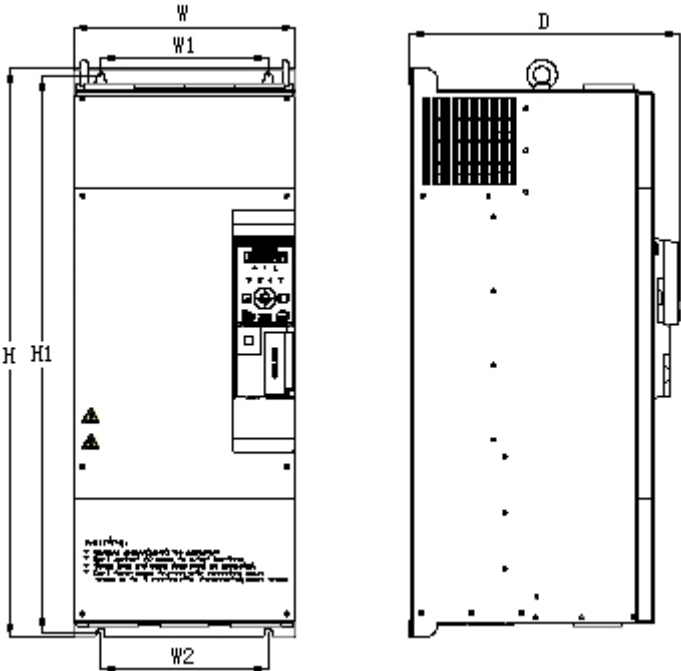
IMD183U43E~IMD303U43E installation dimensions
